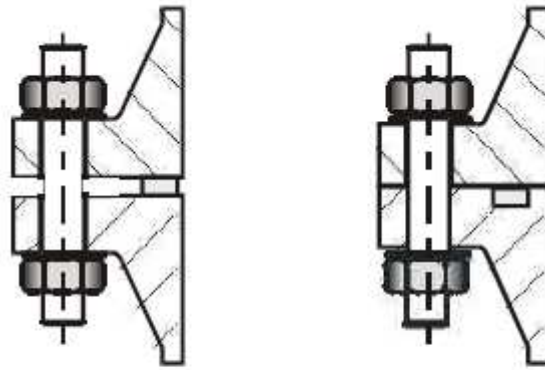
flange type with floating gasket (left) and flange type with metal-to-metal contact (right)
